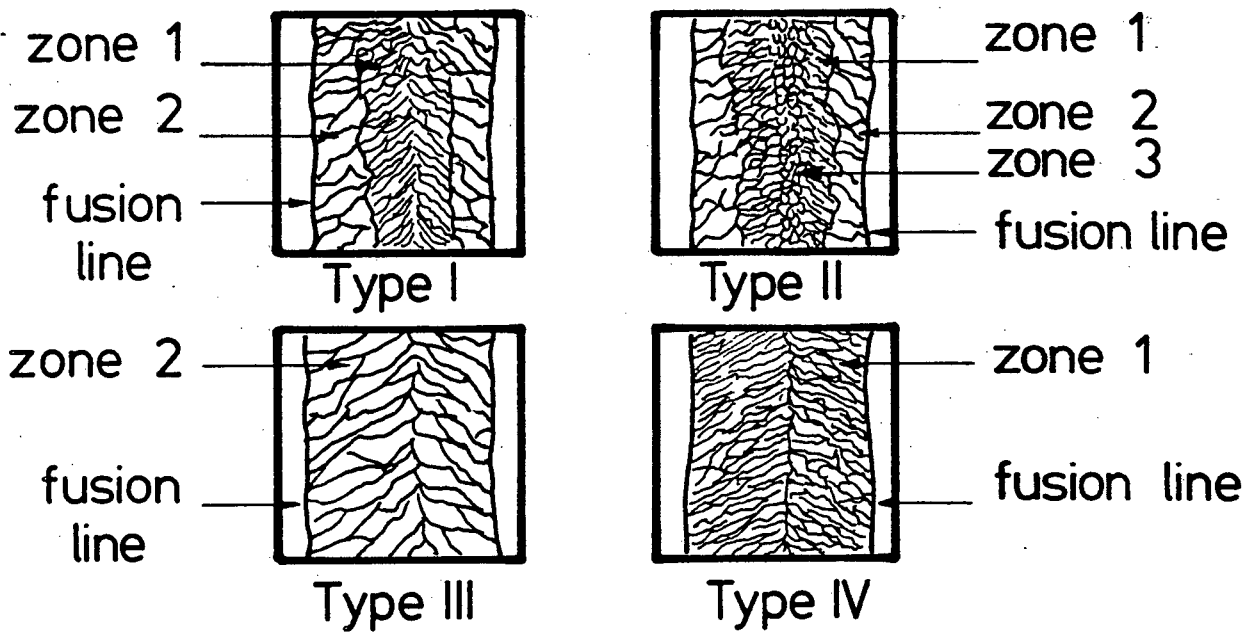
Electroslag Typical Weld Structure(Ref. 35)
